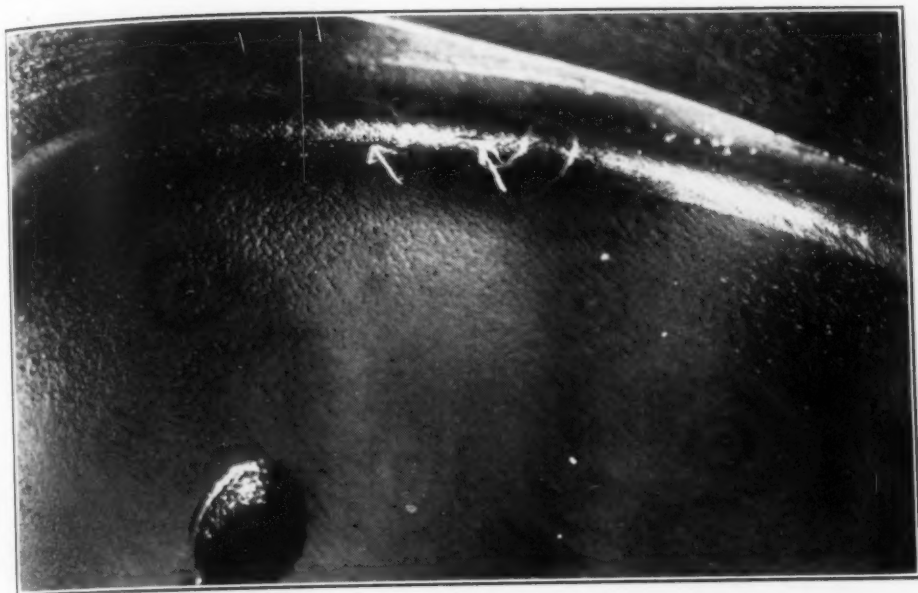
Photograph of Fillet of Crankshaft Journal Showing Small Seams. (About Actual Size.)
